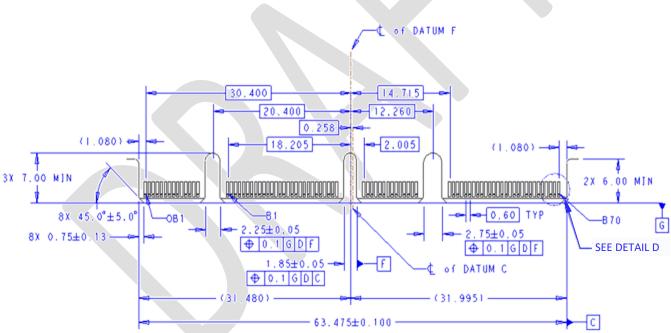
AIC 4C MATING CARD DIMENSIONS
